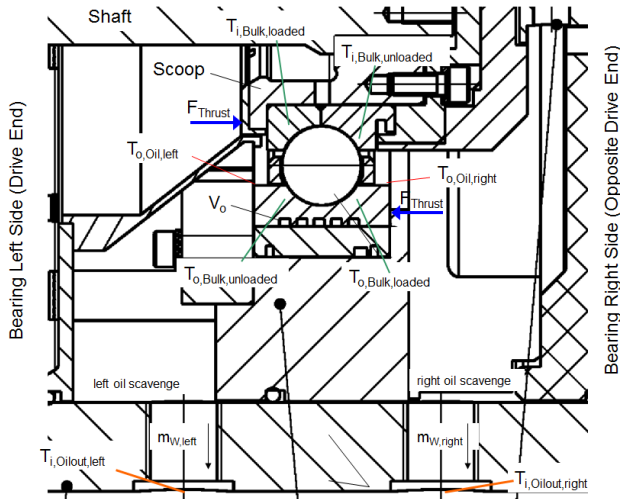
Rig tested hybrid ball bearing and bearing chamber with measured variables
